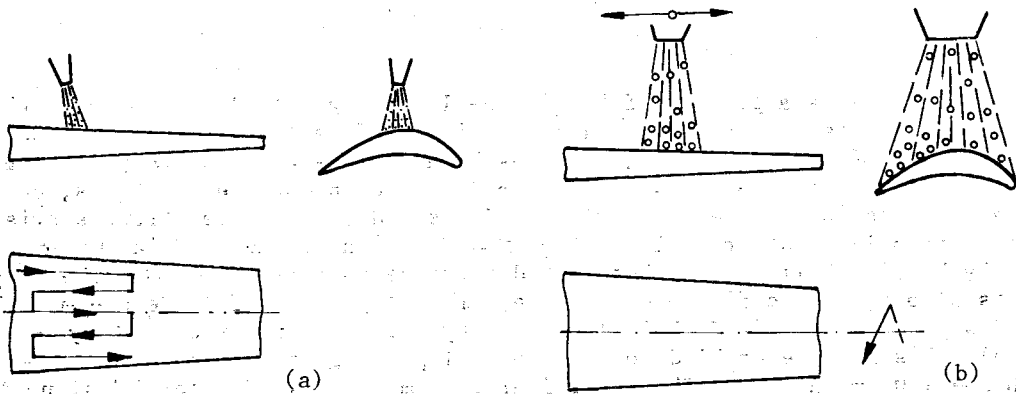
Scheme of surface work-hardening by (a) glass bead peening, (b) bearing ball peening
